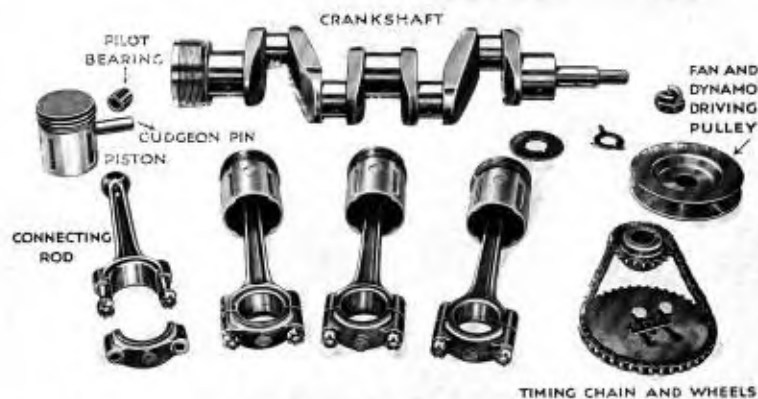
S.S. II. Engine Details: Piston, Connecting Rods, Camshaft, Crankshaft, etc.
